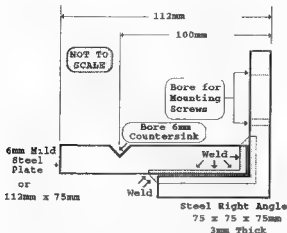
Thrust Bearing Plate Assembly (Elevation)
